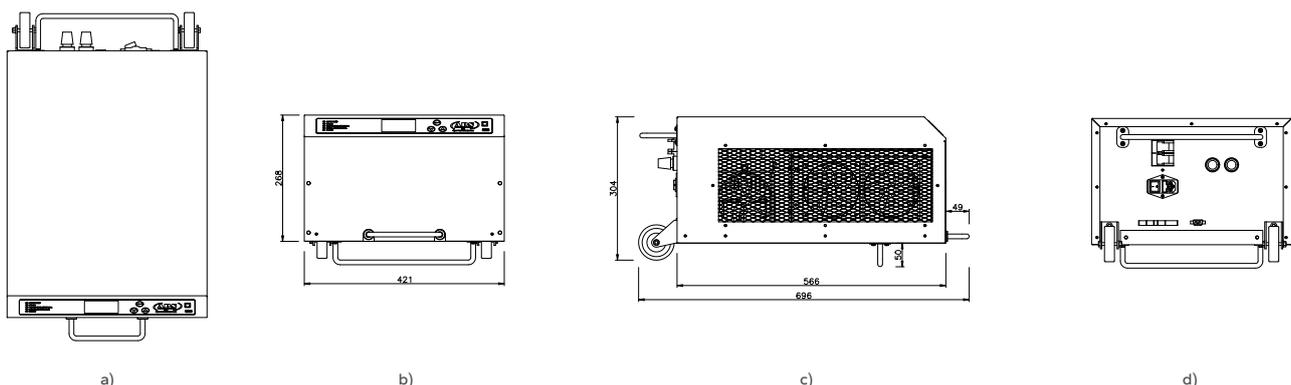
Views with the dimensions of the BRI type discharge mobile compact:
